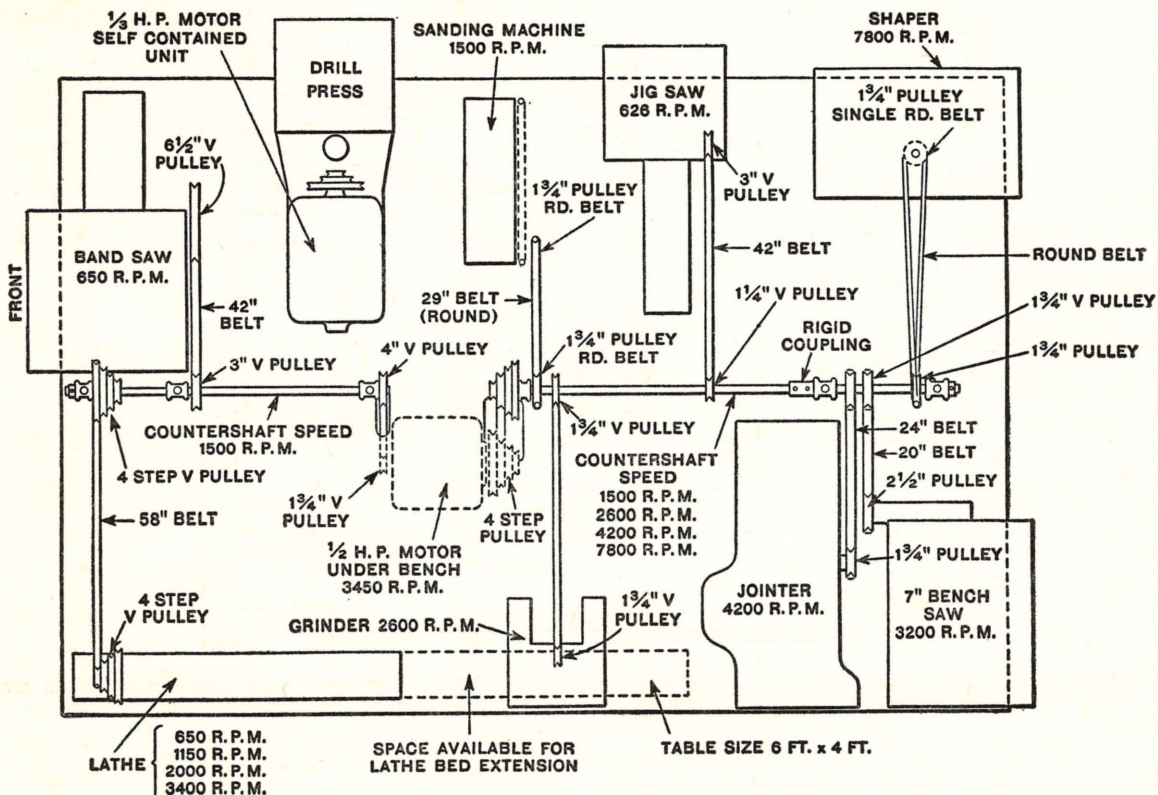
An outfit like this would please many master craftsmen. Two motors will run the entire outfit of nine machines
